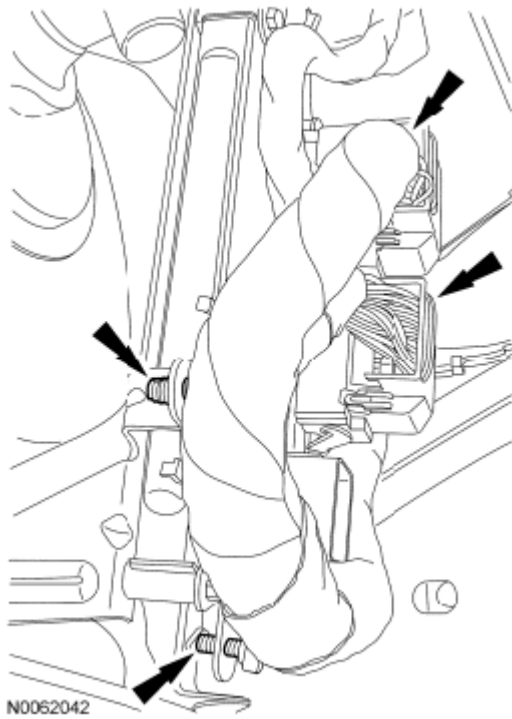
Locating PCM Electrical Connectors & Pin-Type Retainers
